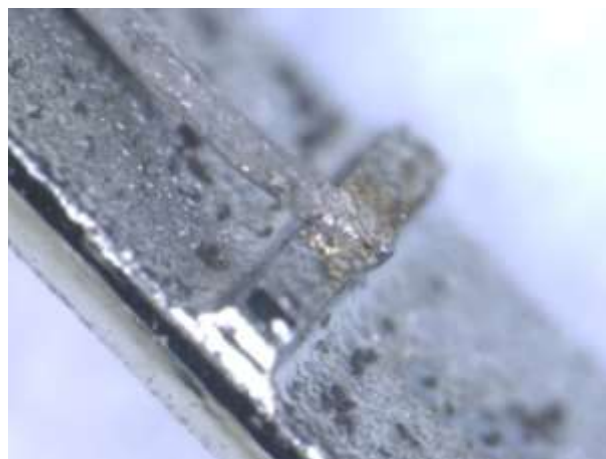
Welding of a Hf emitter sample with a 0.28 mm diameter signal wire of a coaxial cable
